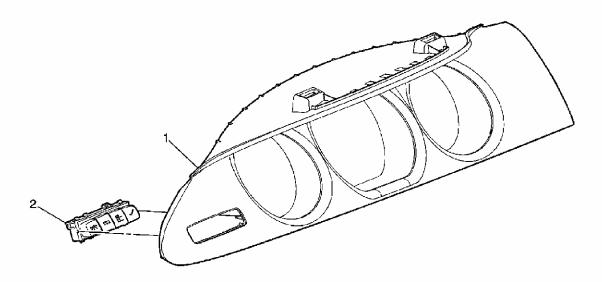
Identifying Driver Information Display Switch Courtesy of GENERAL MOTORS CORP.
